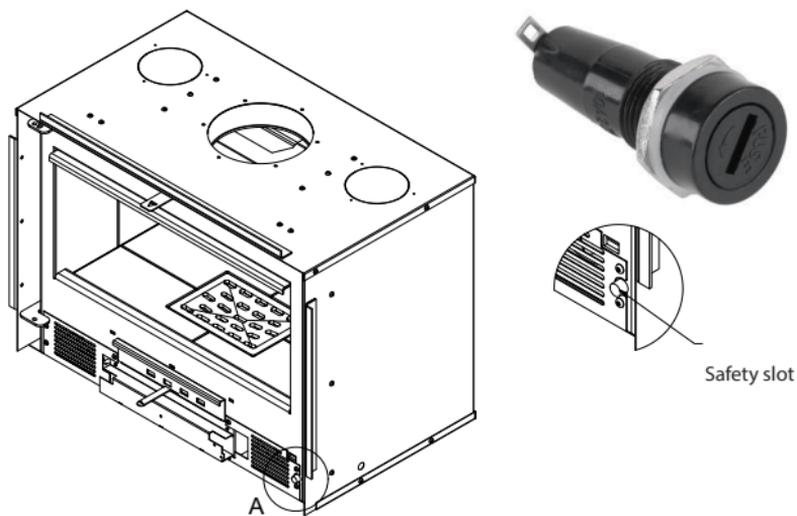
RK cassette - the order of assembly and disassembly of Acumote components
